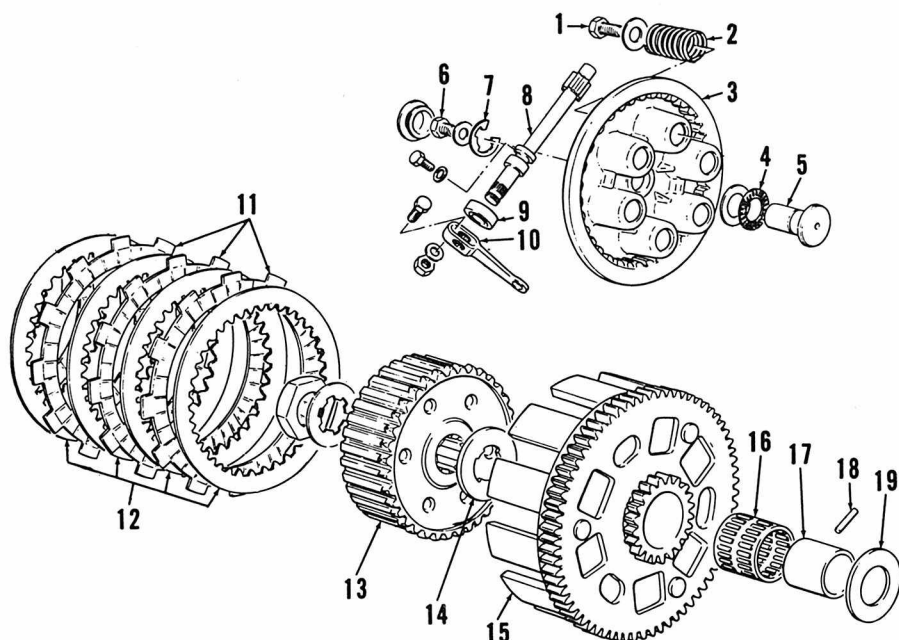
Exploded view of TM 400 R clutch assembly.
